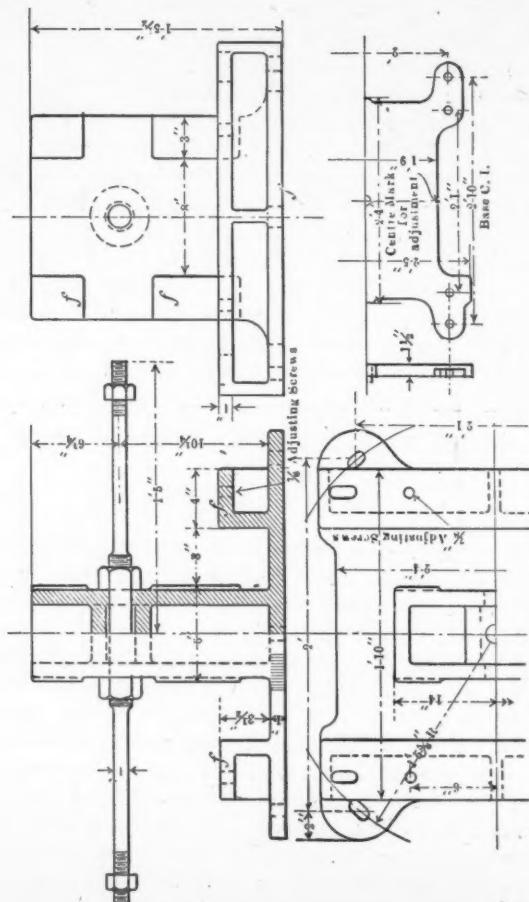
JIG FOR HOLDING DRIVING BOXES WHILE MILLING THE SHOE AND WEDGE FITS.
